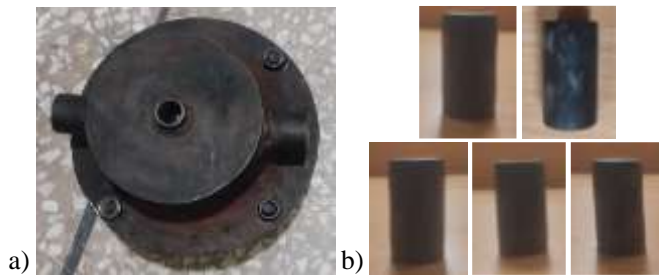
Sample manufacturing; a) sizer die and b) manufactured samples
